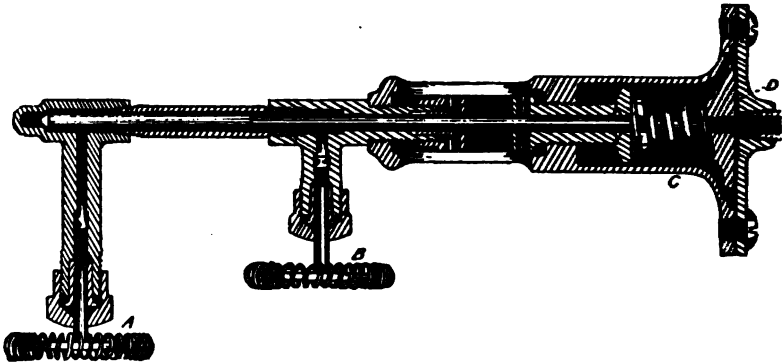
Fuel Feed Regulator of a Steam Carriage Burner, intended for Use with "Torch" Burner Kindler or Auxiliary Vaporizer. A is the hand wheel and needle valve regulating the feed to the main burner; B, the hand wheel and valve for operating the torch; C, the spring and header attached to the main valve rod; D, the diaphragm against which steam bears, regulating the main valve according to pressure. The liquid gasoline is admitted at a port on the left-hand extremity of the regulator tube, near the end of the needle valve on the main rod.
